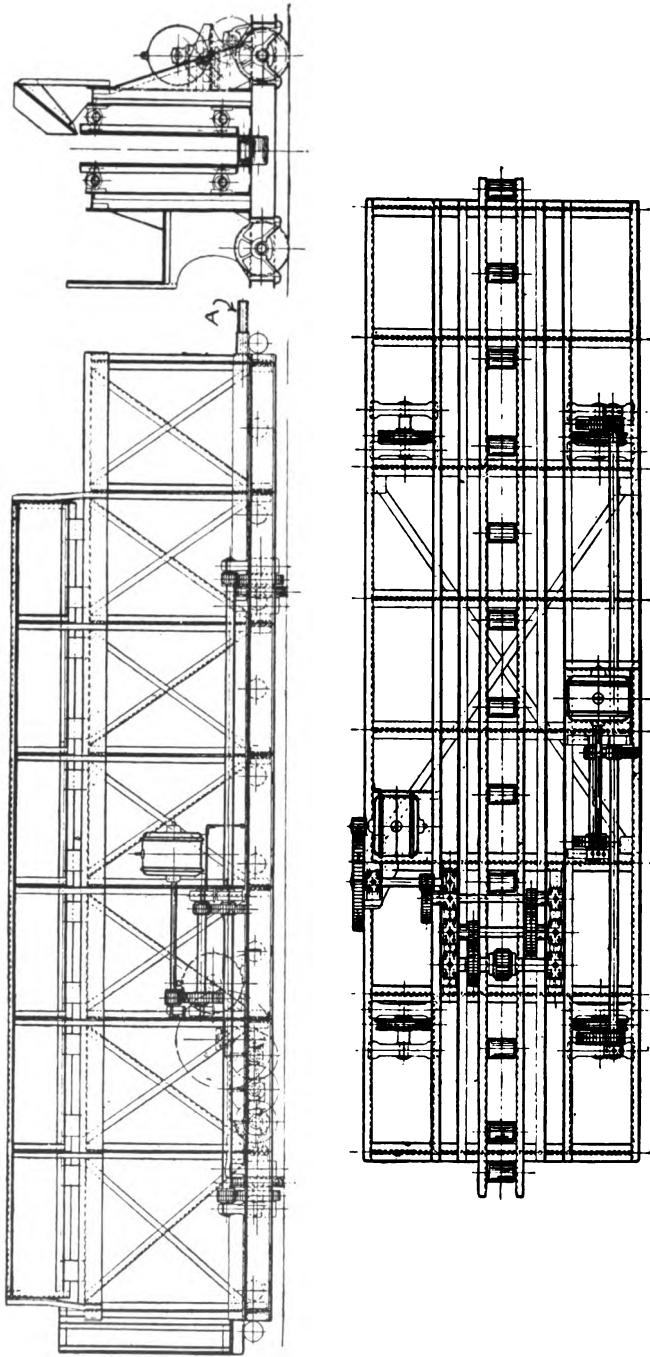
DARBY'S COMPRESSING MACHINE.
